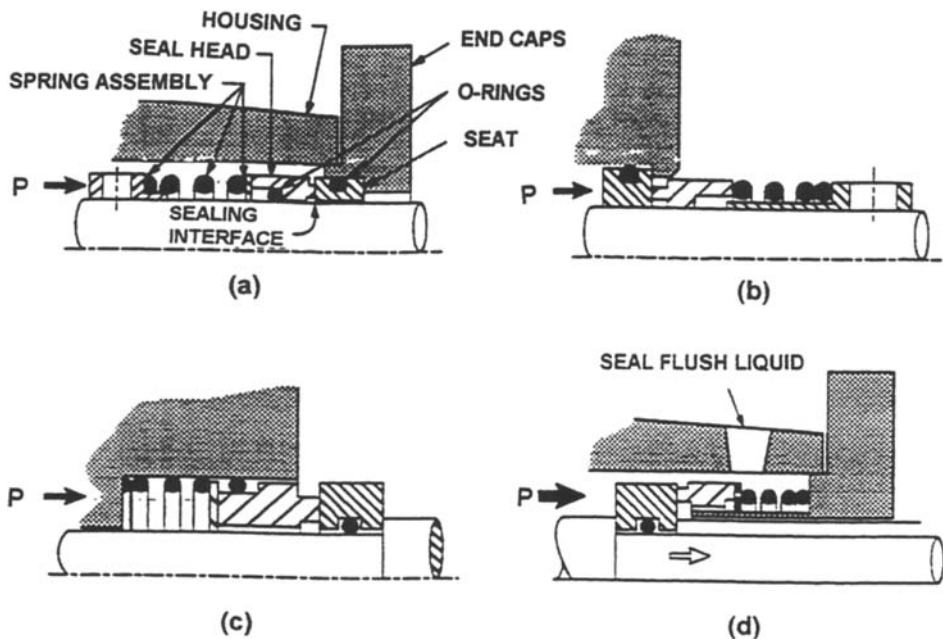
Illustrations of typical mechanical seal configurations. (a) Rotating seal head pressure on the outside diameter of the faces; (b) rotating externally mounted seal head pressure on the inside diameter of the faces; (c) stationary internally mounted seal head pressure on the inside diameter of the faces; (d) stationary externally mounted seal head pressure on the outside diameter of the faces.
